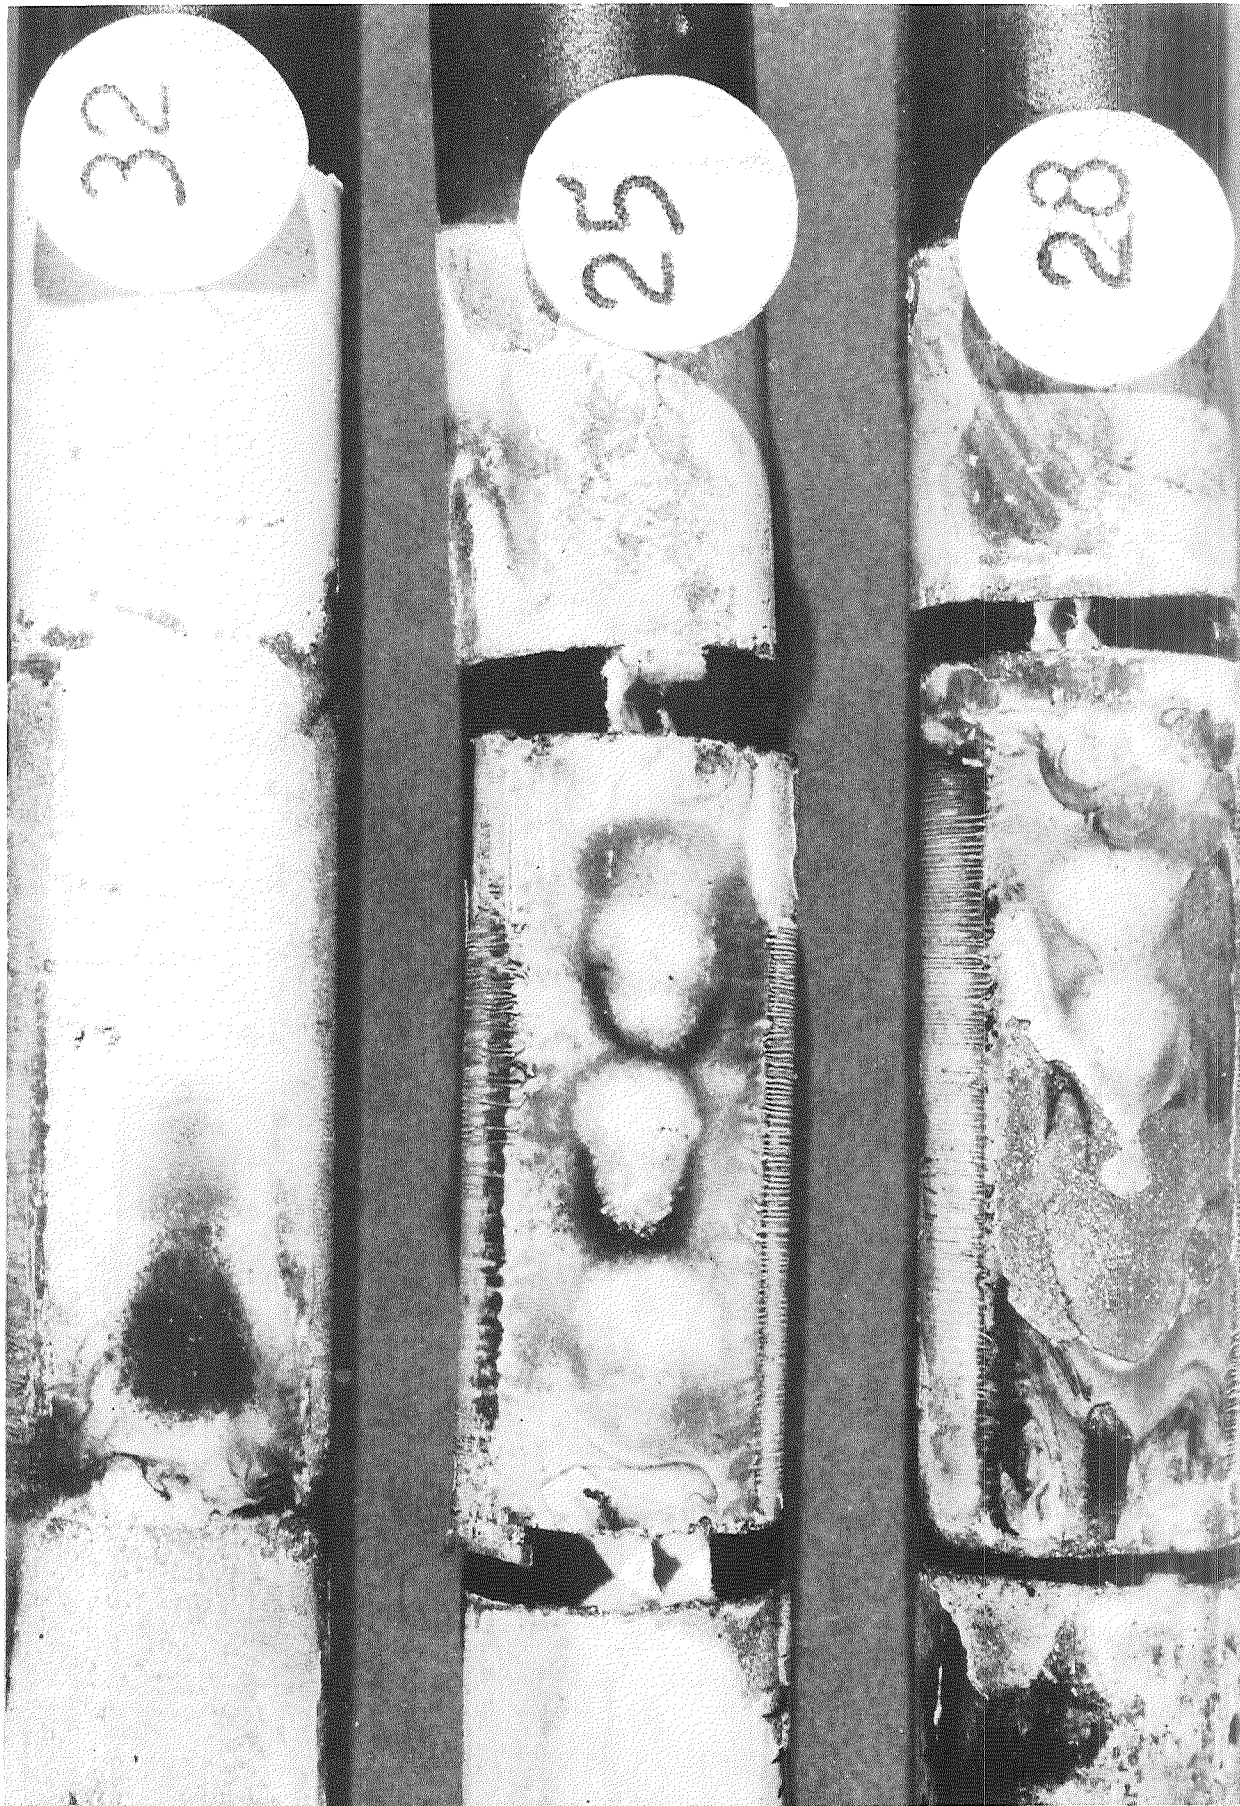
Coated-Tube Specimens After Rocket Engine Test at $P_c = 575$ psia.
